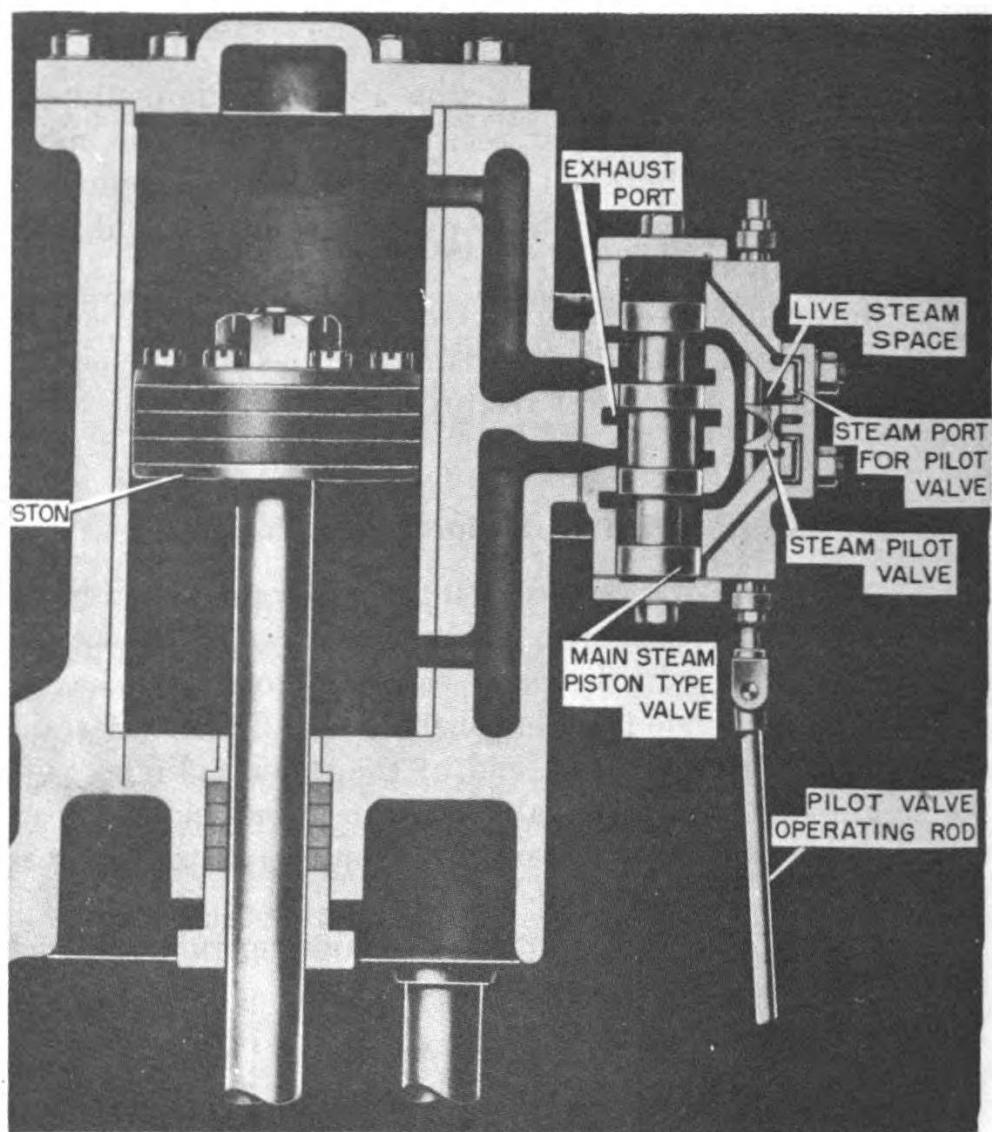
Piston-type valve gear for steam end of reciprocating pump.
